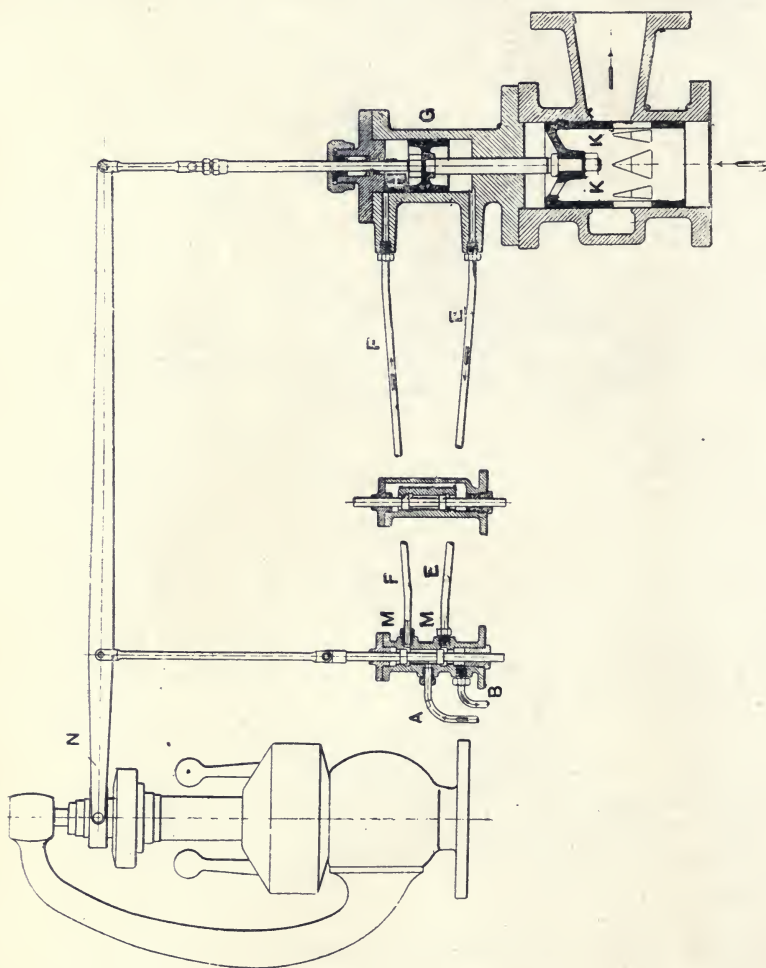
GOVERNOR GEAR OF ZOELLY TURBINE.
